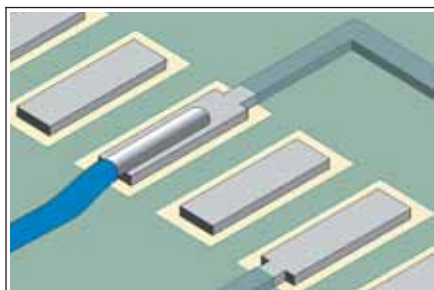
Acceptable Wire soldered parallel to conductor, contact, SMT pad.
